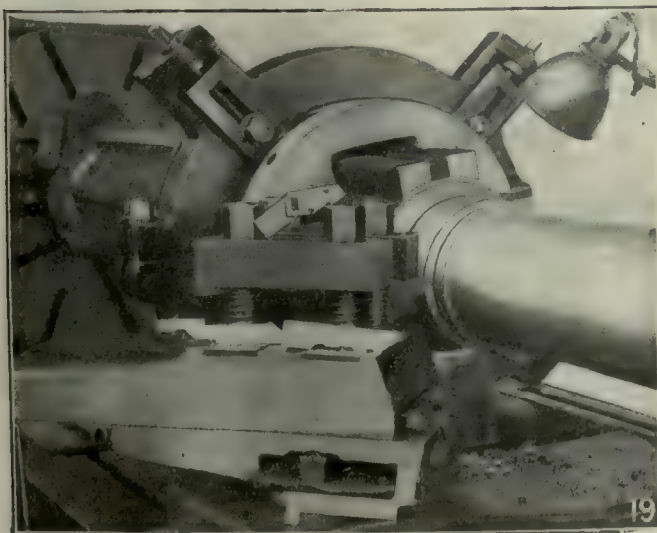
FINISHING THREAD SURFACE FOR LOCKING HOOPS
